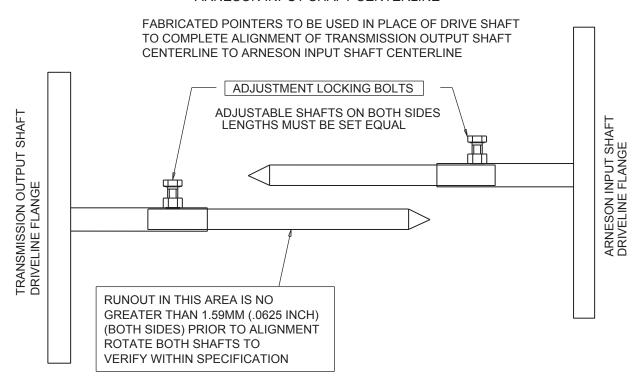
Remote or Island Mounted Alignment Tool, Shafts Parallel
